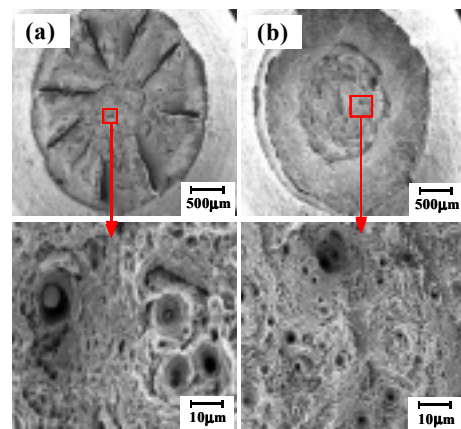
Fracture surfaces of tensile test for TML; (a) R.T. and (b) 400 °C
